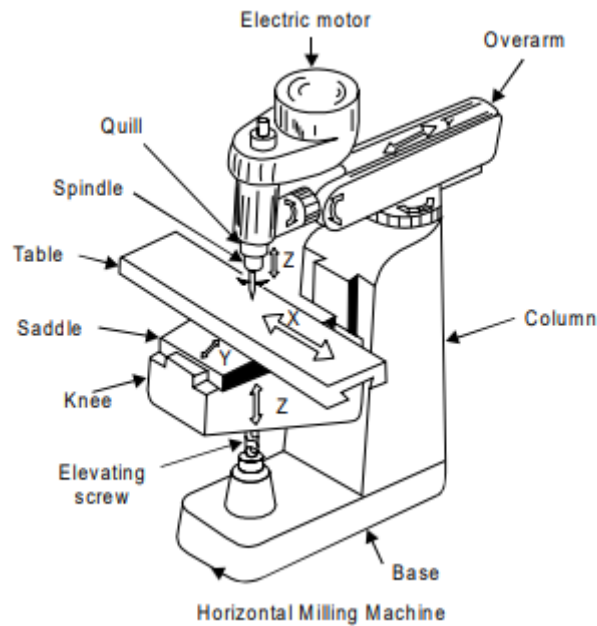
Shows horizontal column and knee type milling machine(wordpress.com).
